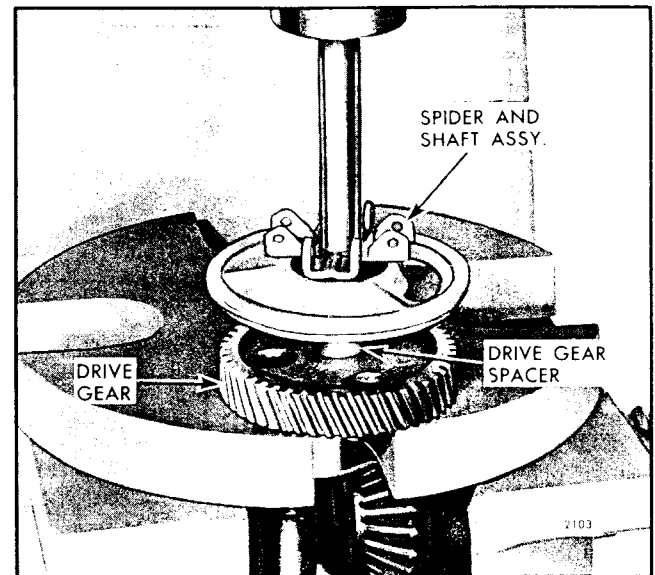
Installing Drive Gear on Spider and Shaft Assembly
